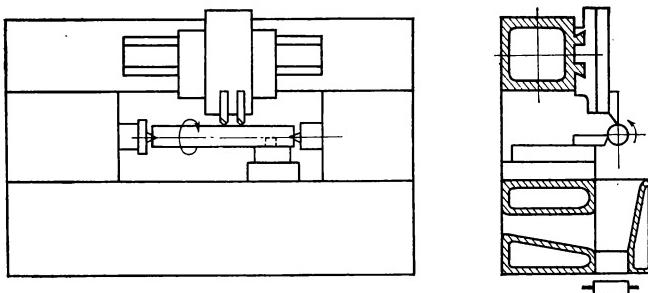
Frame-type layout with vertical arrangement of the longitudinal carriage on the crossrail
